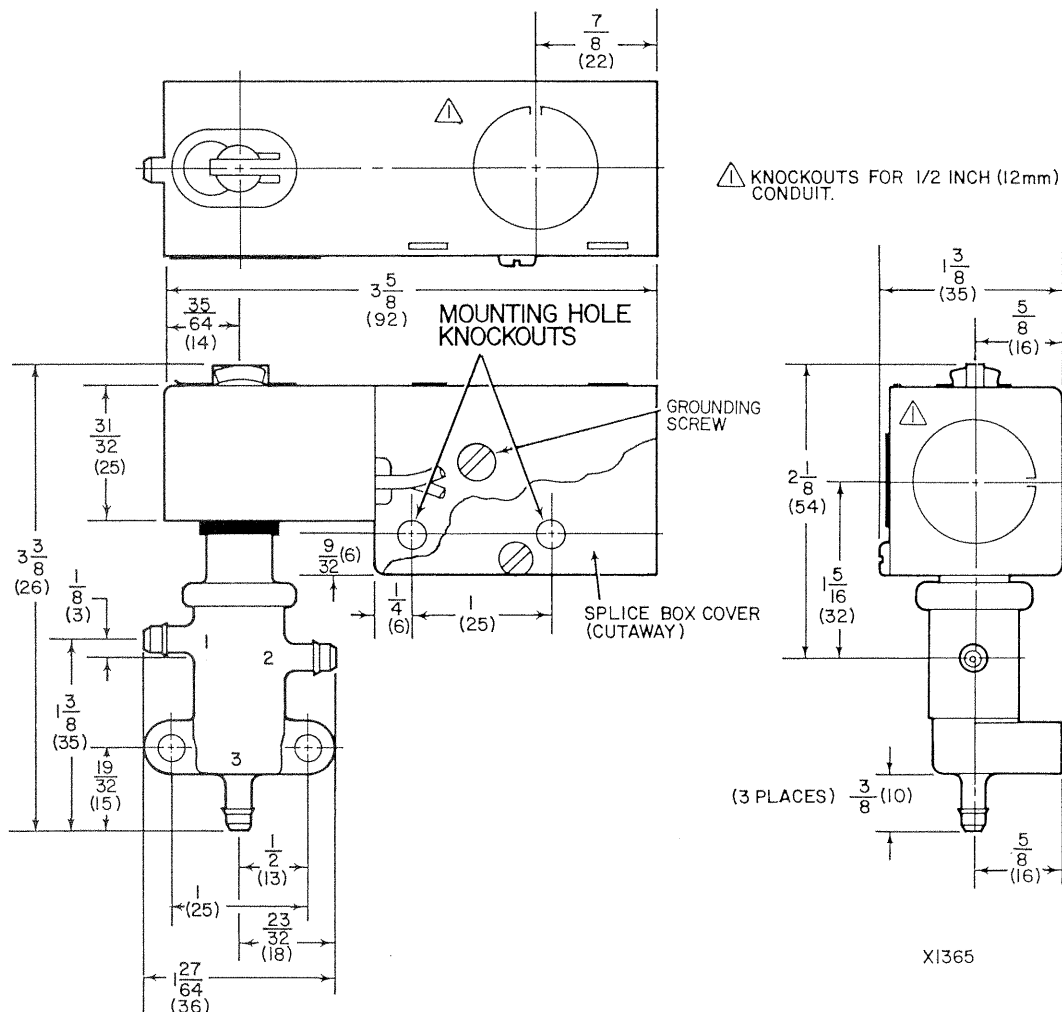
Approximate Dimensions in Inches (Millimeters).
